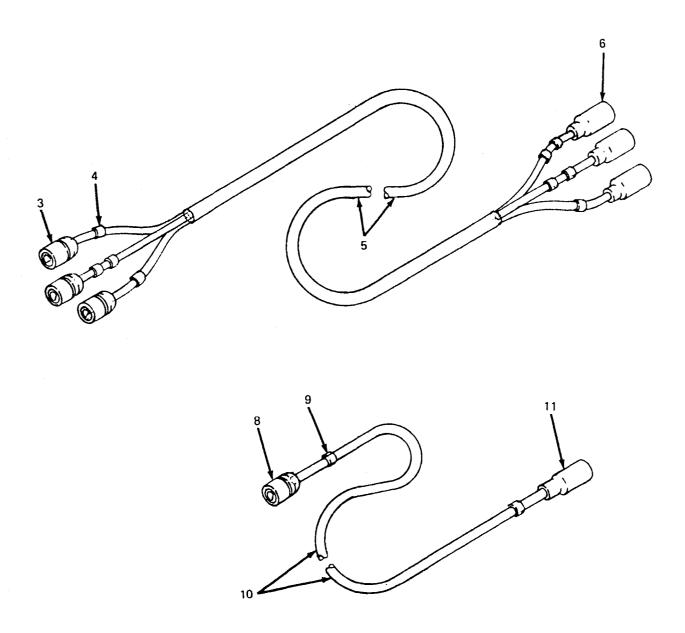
Taillight Cable Assembly and Electrical Lead.
